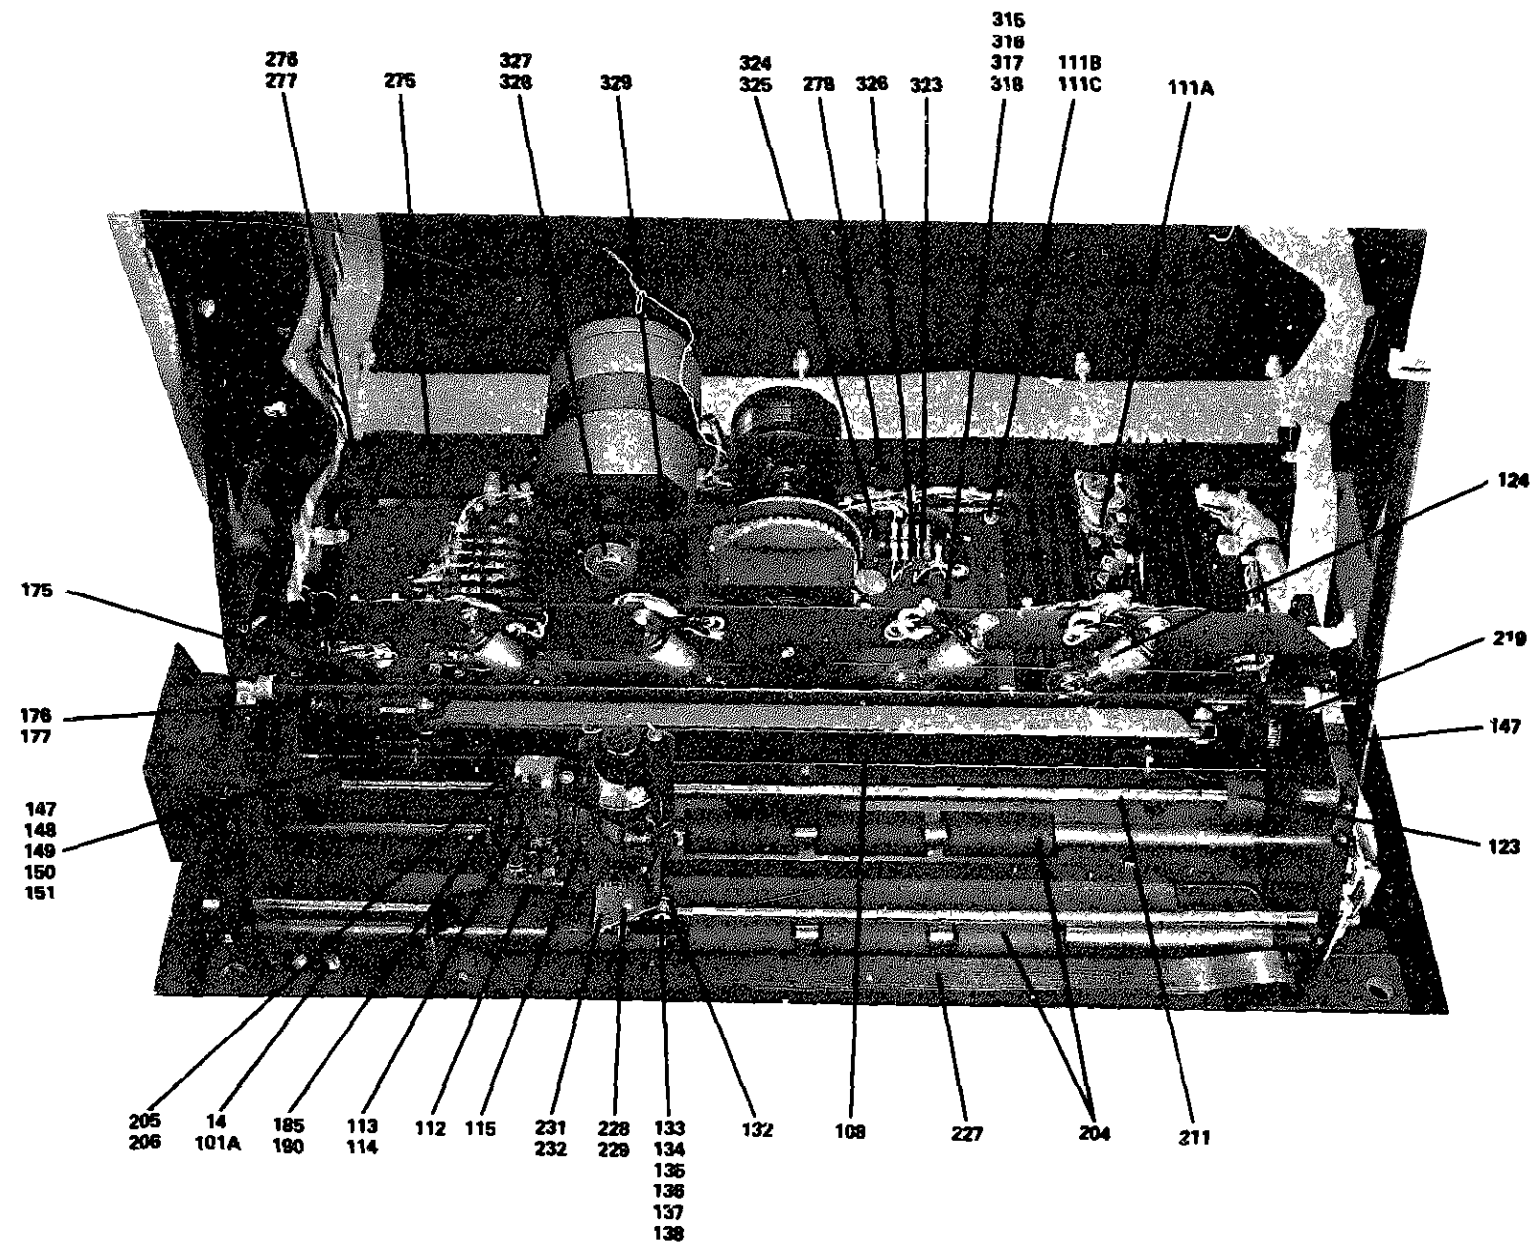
Read Head and Paper Drive Assembly 1A7 (Sheet 4 of 8)
